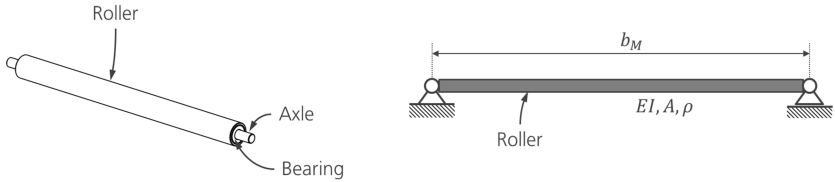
Guide Roll with ball bearings and axle (left) and approximation model for sizing (right).
